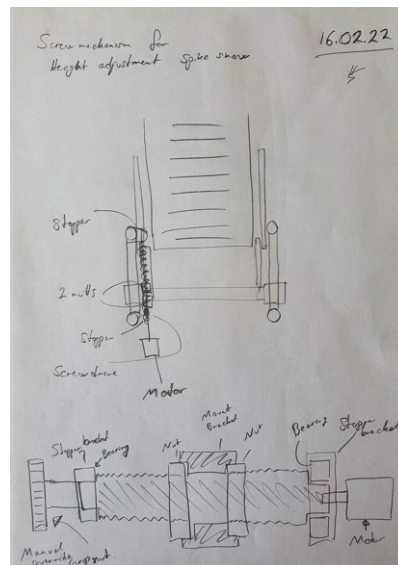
Sketch of the proposed height adjustment mechanism with top view and detailed view of the screw mechanism.
